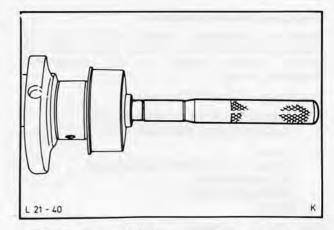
Fitting crankshaft pilot bearing using Special Tool 21–044
